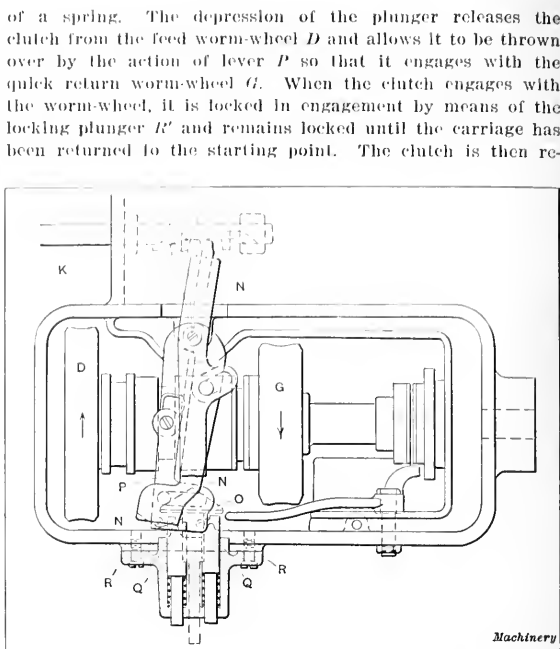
Mechanism for engaging Feed and Quick-return Worm-wheels
